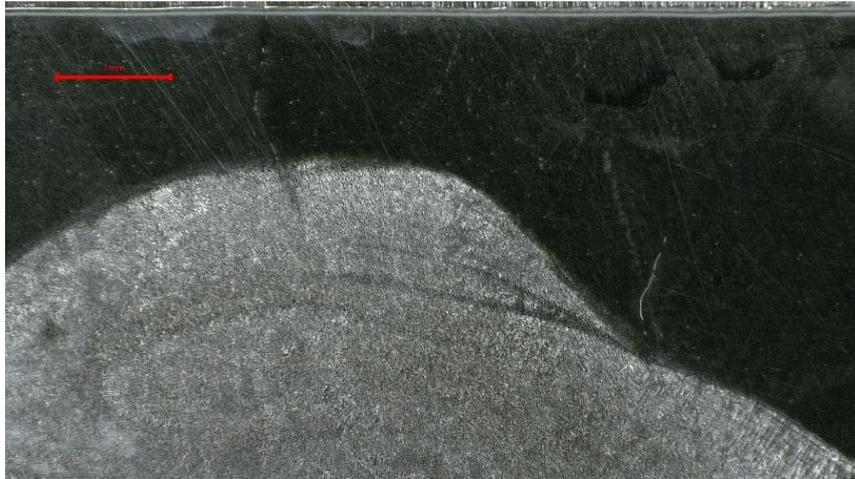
Cracks in the weld's ending on second test specimen.
